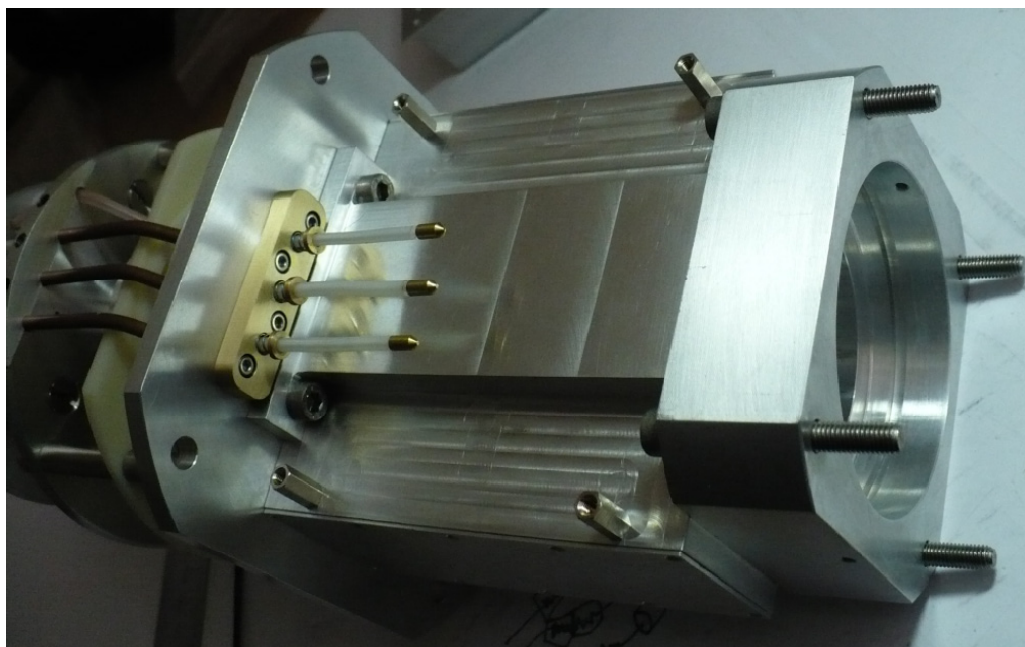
With the Clamp box removed take care not to damage the three high voltage leads or to loose the three washers and springs. Check that the tree brass end connections are in good order and well soldered to the cables. Note that these cables have copper inner conductors and are not as robust as most semirigid cables.
